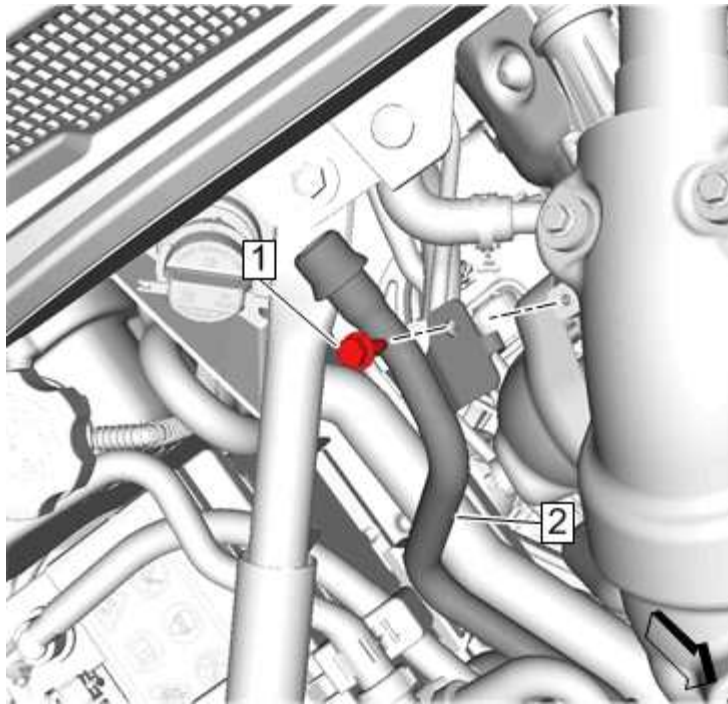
Heater Outlet Pipe And Retainer Bolt
